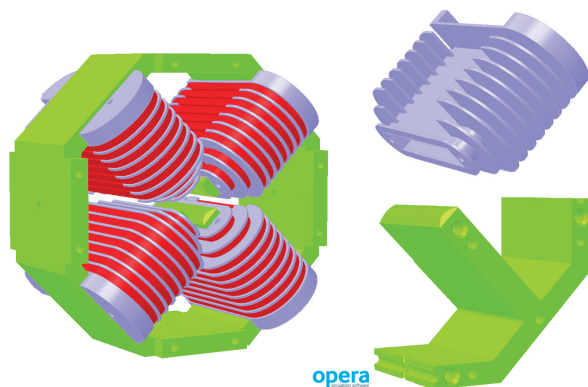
Basic layout of the in-vacuum quadrupoles (left). Water-cooled coil former (top right) and yoke module (bottom right).
